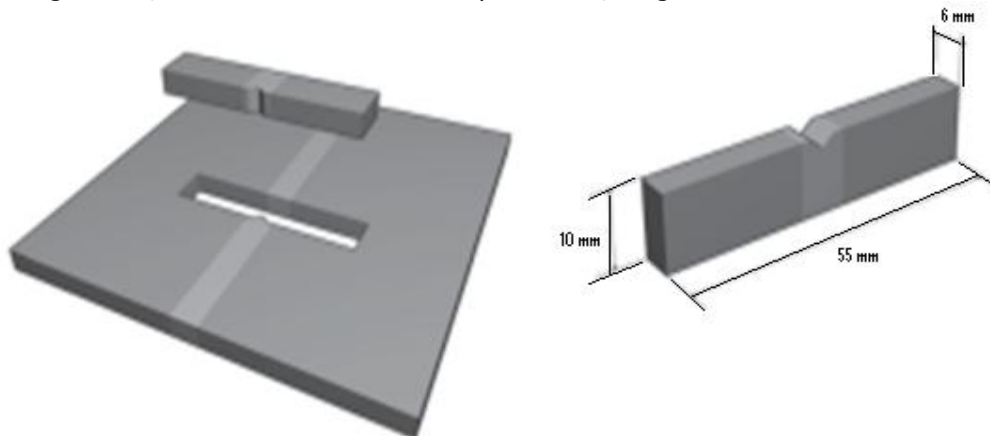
4 Scheme of the machining of Charpy specimens from FSW plates
